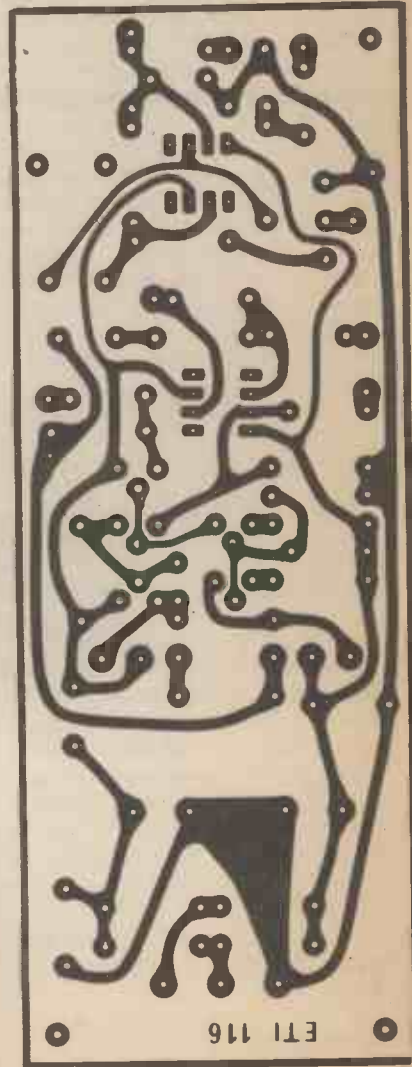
Printed circuit board layout. Full size. 140 x 62 mm.
